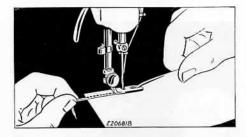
Hemming Edge of Material and Pulling Back Threads While Sewing
